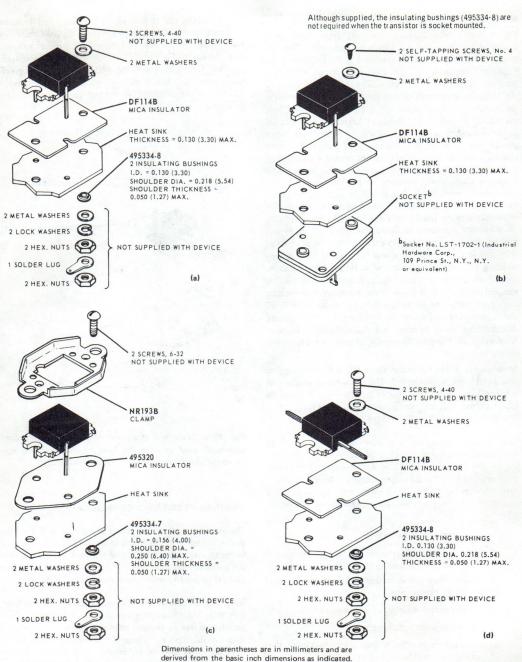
Mounting arrangements for high-power plastic-package transistors: (a) chassis mounting; (b) socket mounting; (c) chassis mounting with top clamp; (d) printed-circuit-board mounting.
